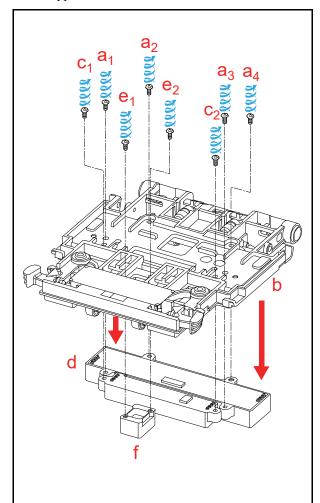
CIS, Transmissive Light & Upper UV Sensor Removal
